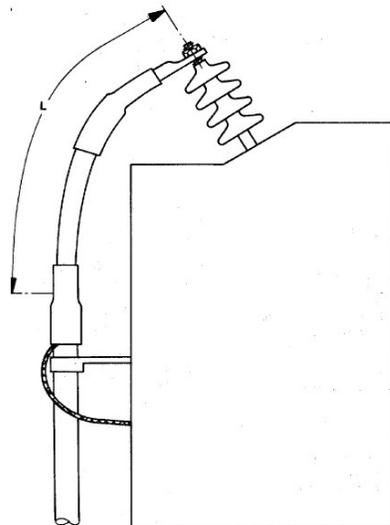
7.2 kV-36kV Outdoor Termination as Connection Equipment
